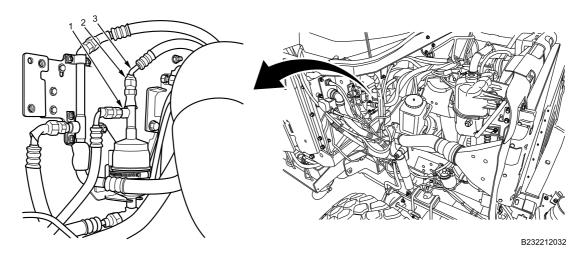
Left Condenser Outlet Hose Fitting at HVAC Filter.
